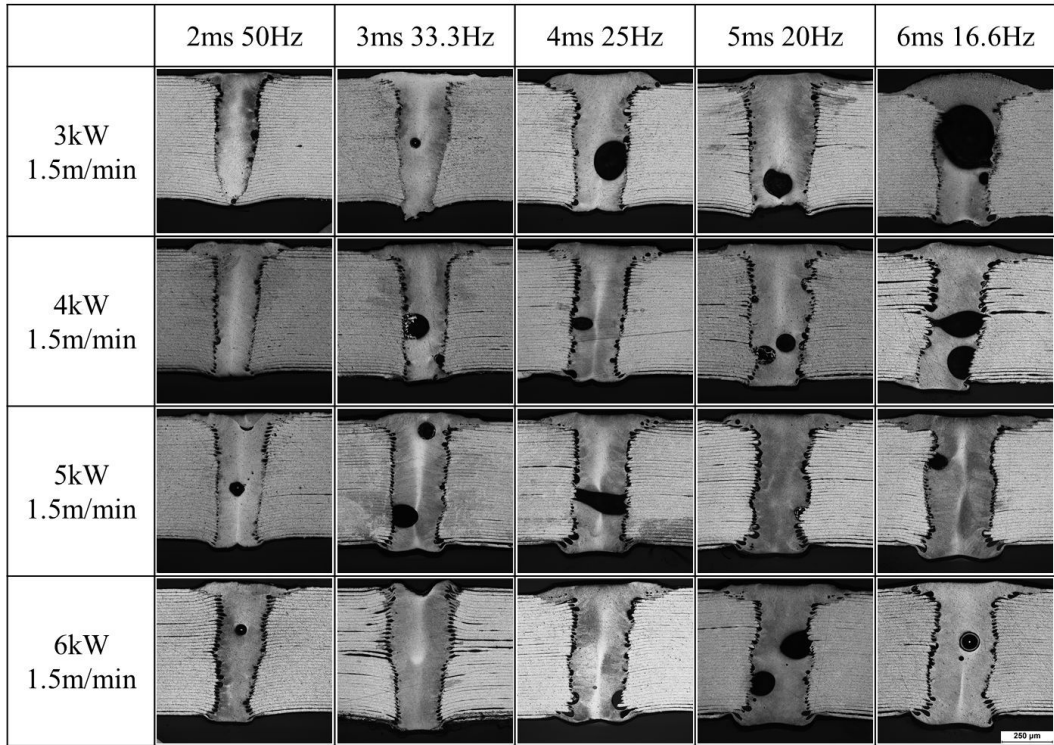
Welding cross-sectional area to variation of welding process parameters
